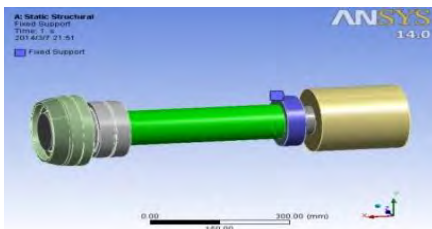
Bearings Fixed Constraint and without Sliding Friction
